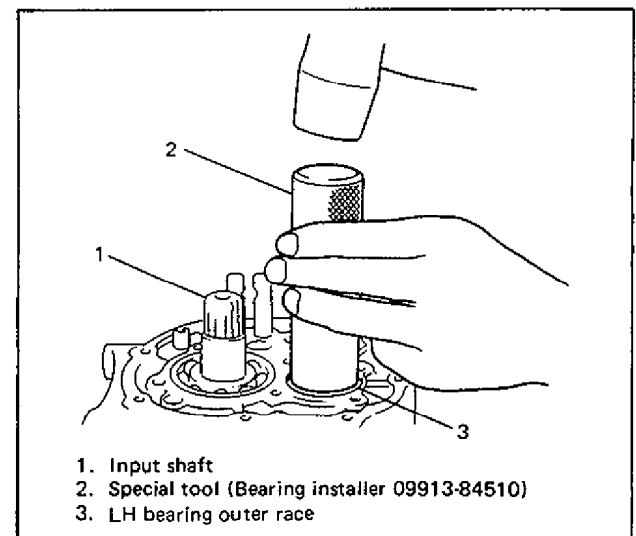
A-76 Seating Counter Shaft L Bearing Cup
